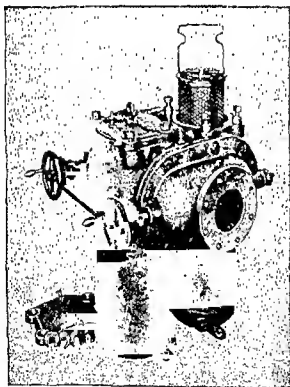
Lubricating-oil duplex strainer—sliding-valve design (see Fig. 5).
